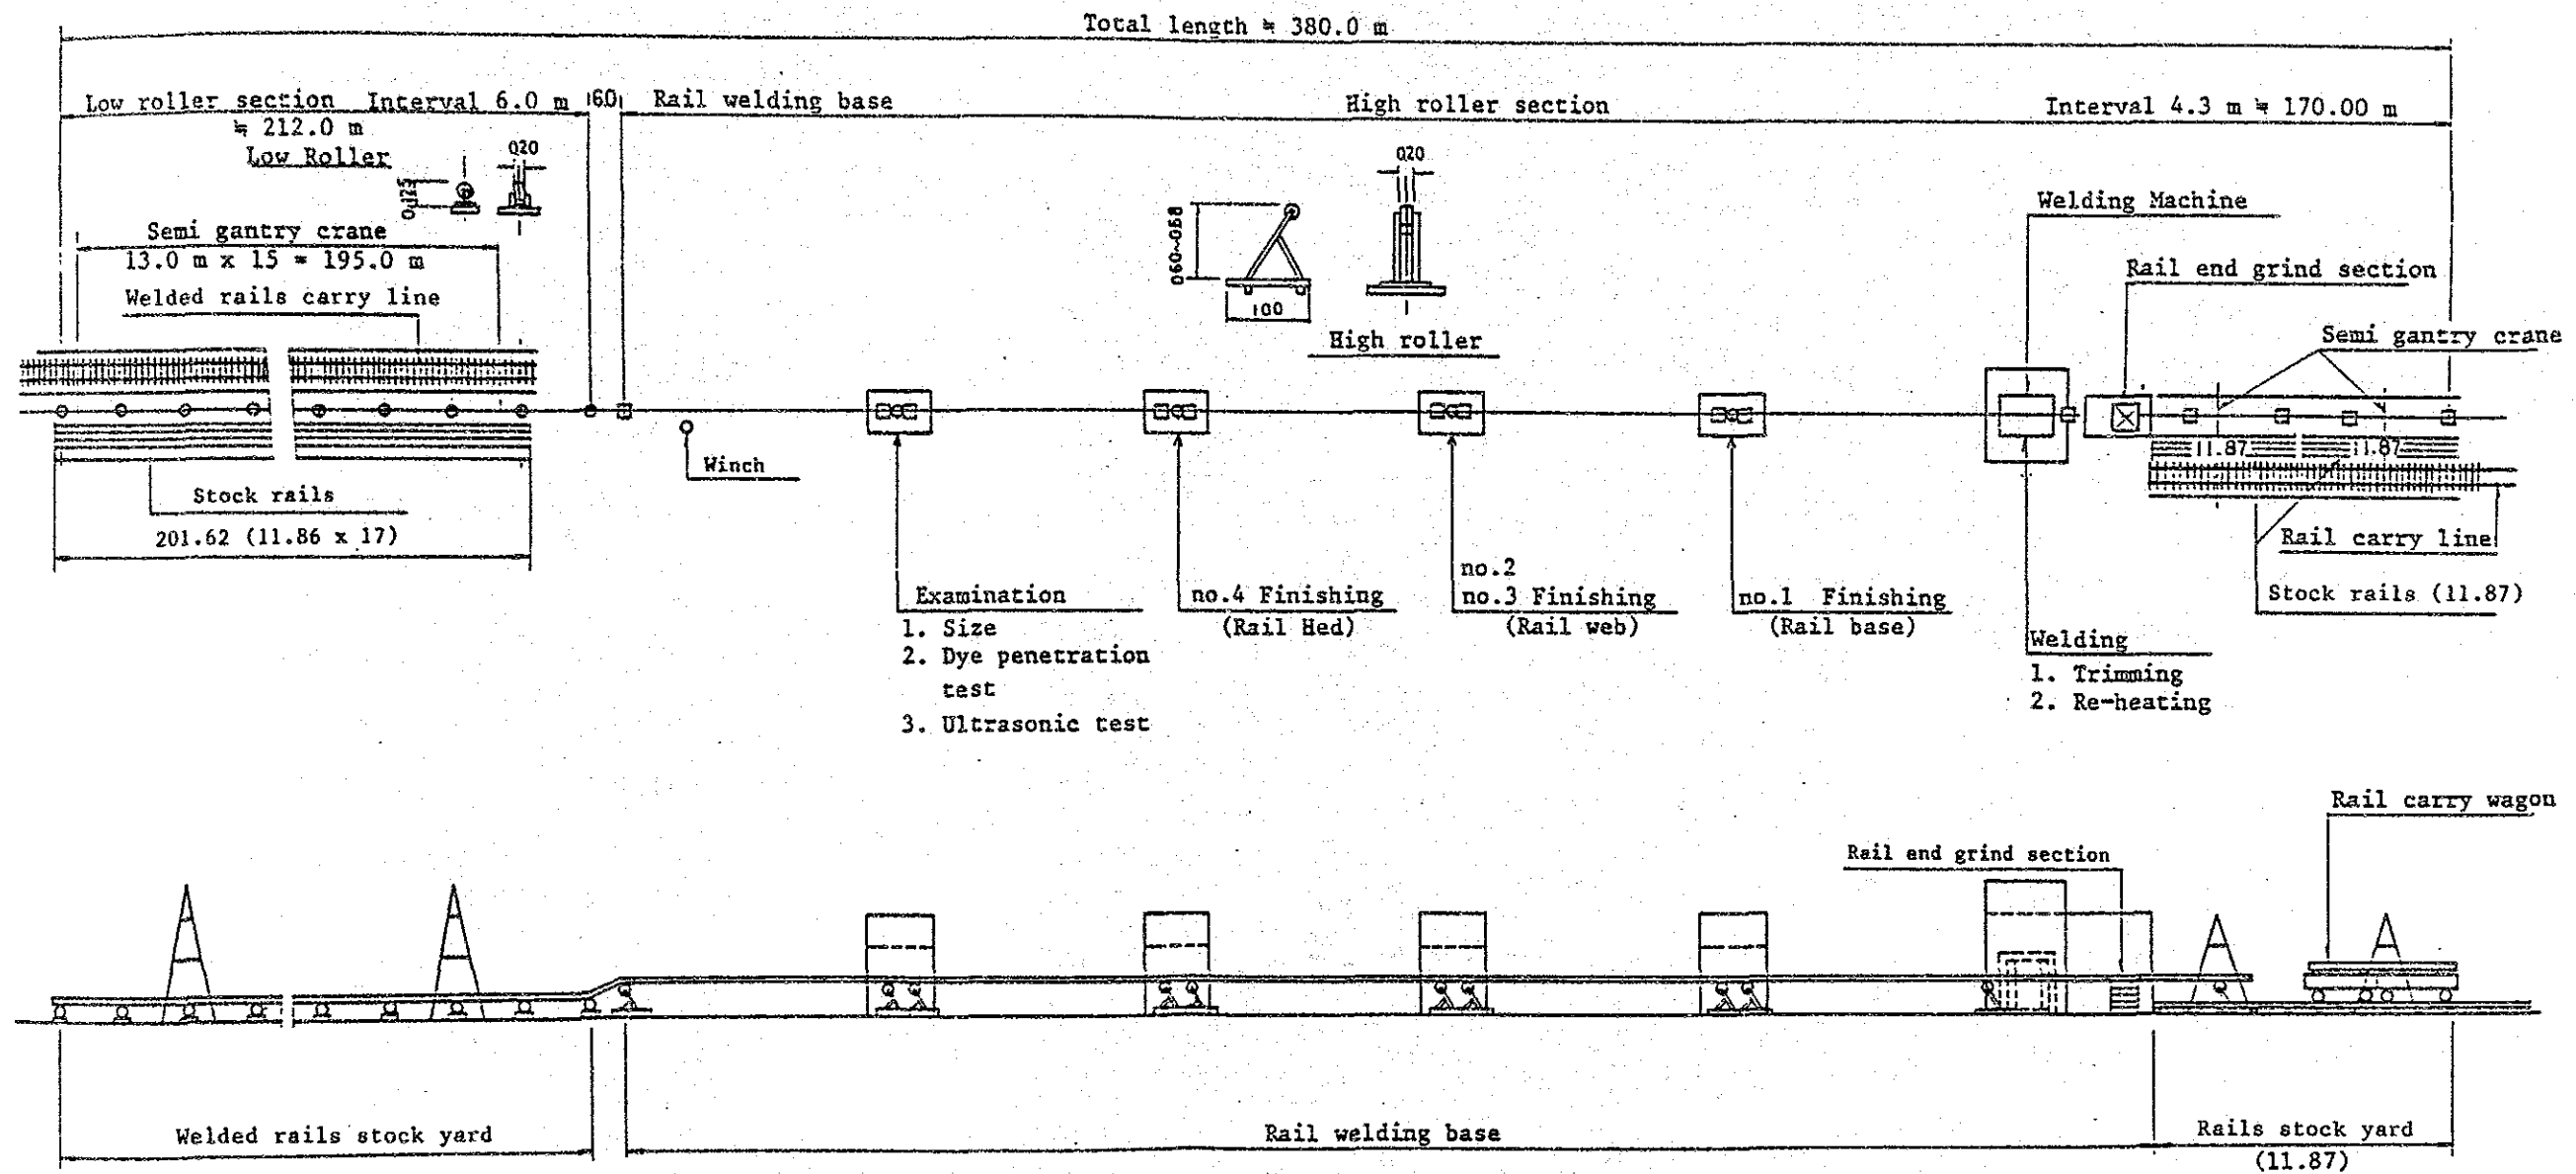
Typical Rail Welding Workshop
